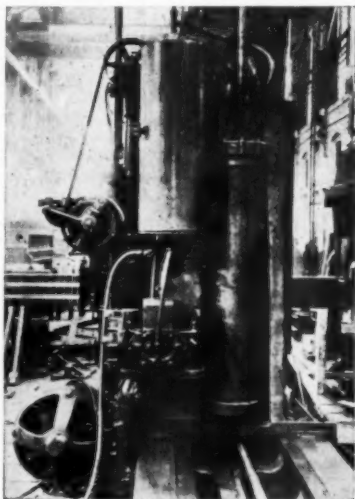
Air counterbalances the vertical movement of the head on this draw shaper machine. (Courtesy Compressed Air Institute).
